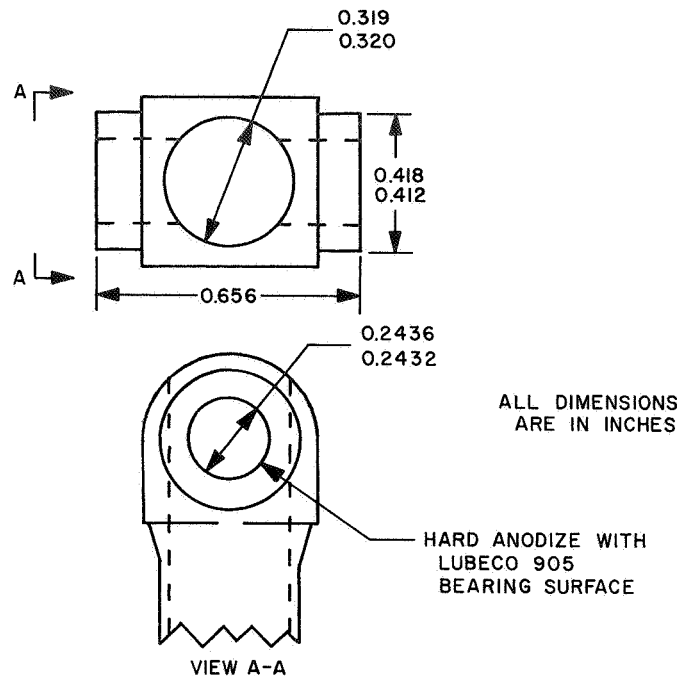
Surface drawing of Lubeco 905 journal bearing
